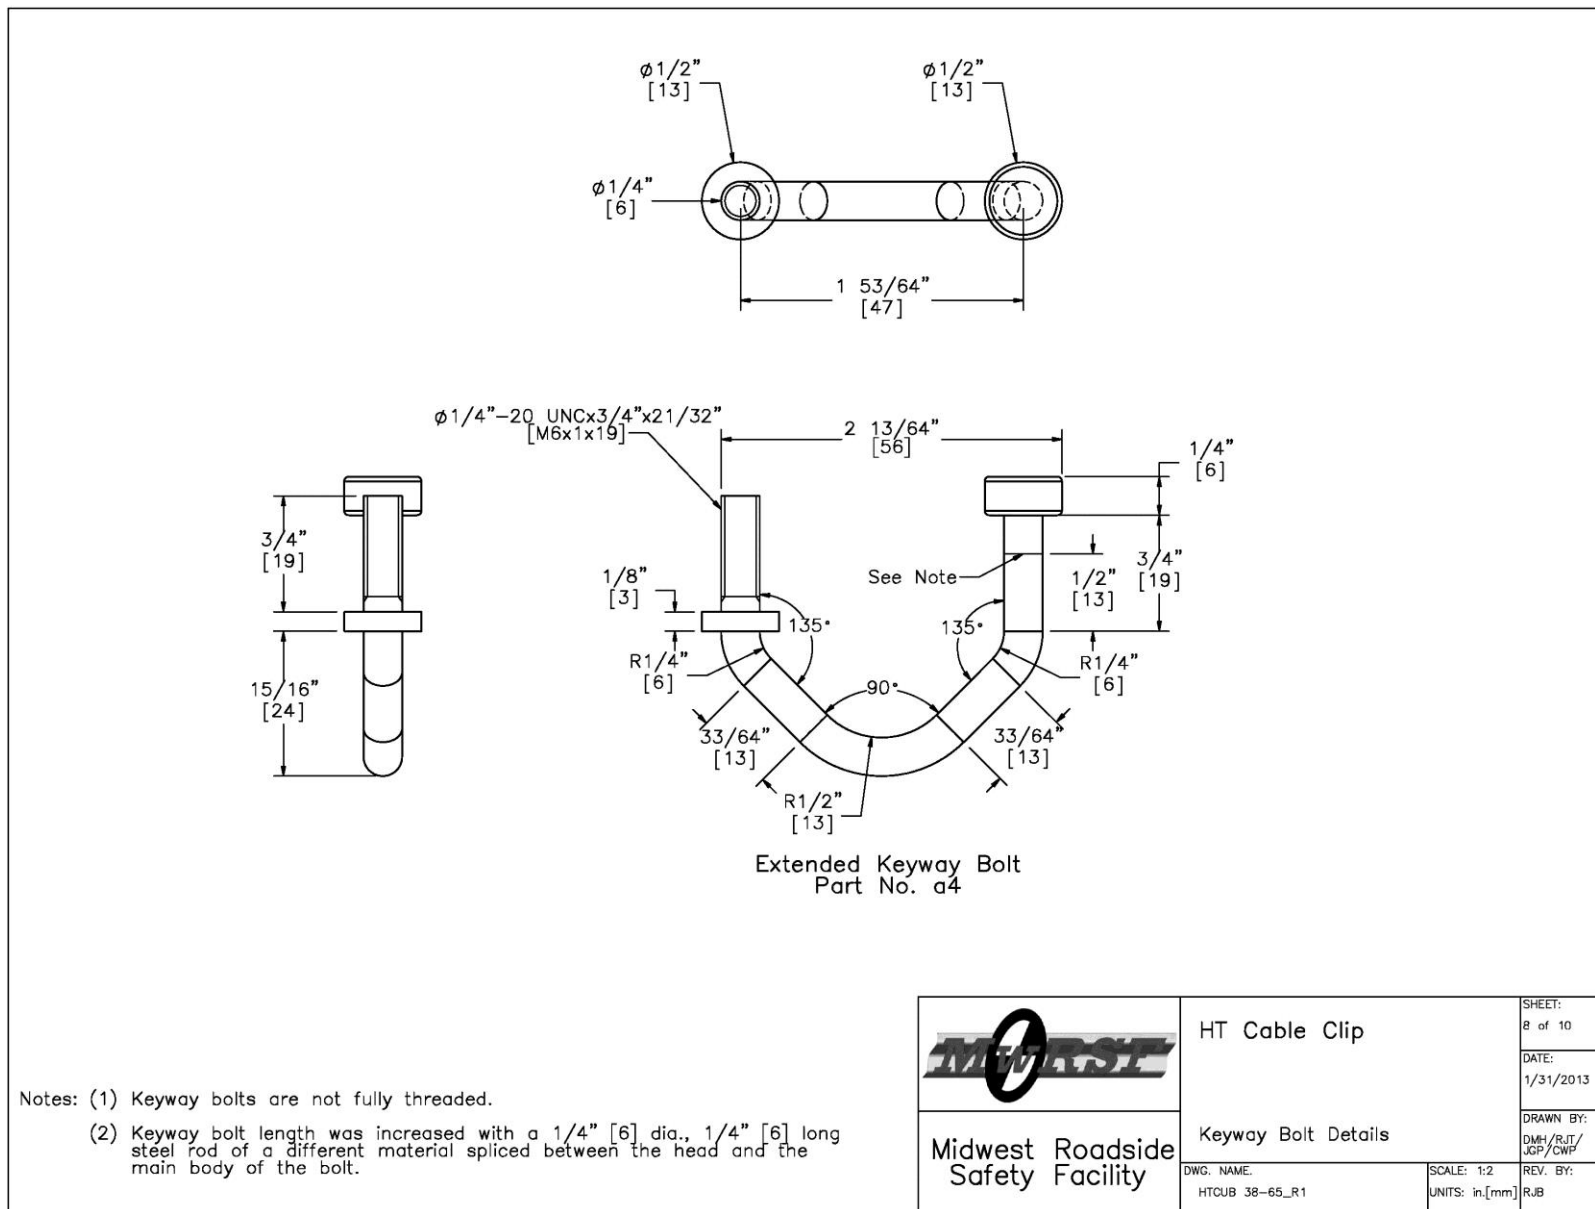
Extended Keyway Bolt Details, Test Nos. HTCUB-38 through HTCUB-65
